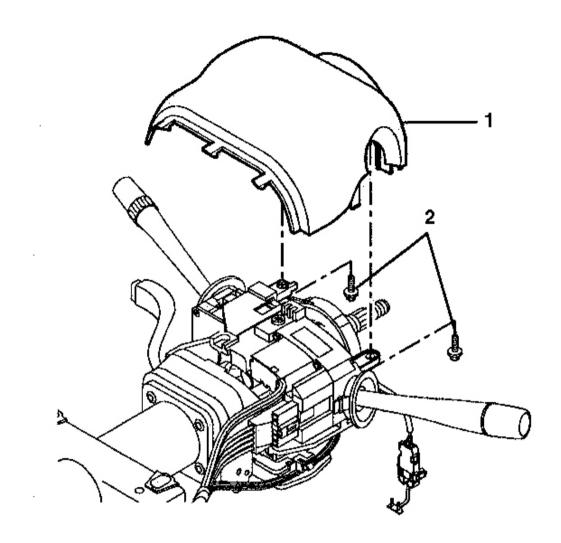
TORX(R) Head Screws & Upper Trim Cover Courtesy of GENERAL MOTORS CORP.
